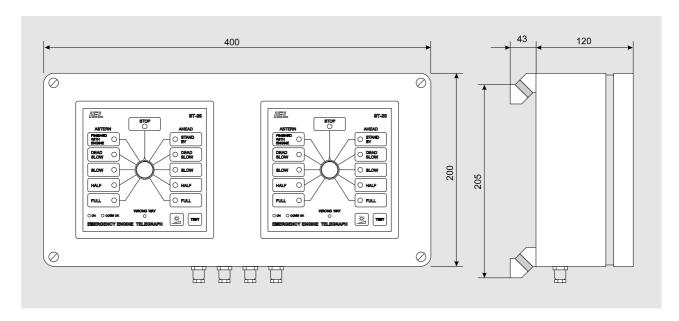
ST-20 - bulkhead mounting in engine room (option)
